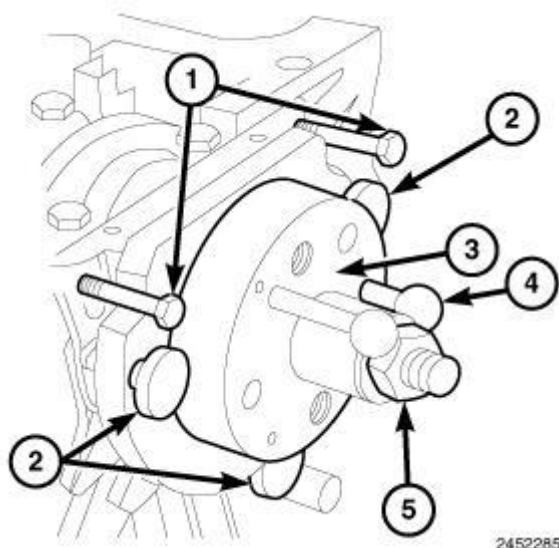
Crankshaft Flange And Sender Wheel
